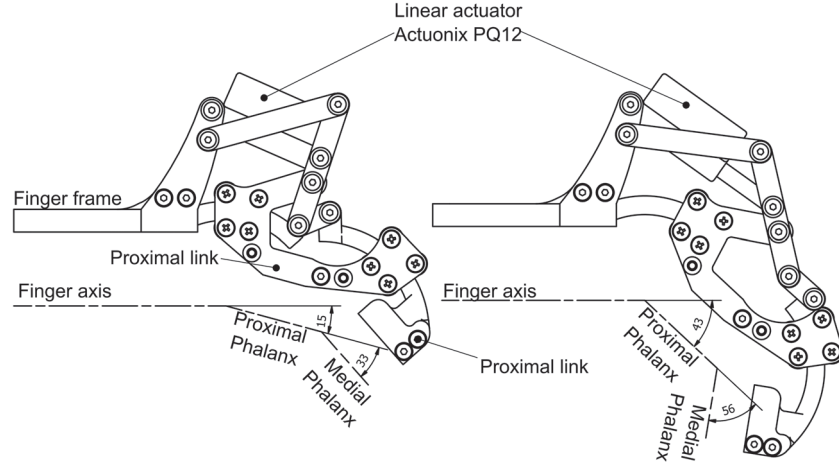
Drawing of a finger mechanism with extreme positions. (Left: Maximum extension. Right: Maximum flexion)
